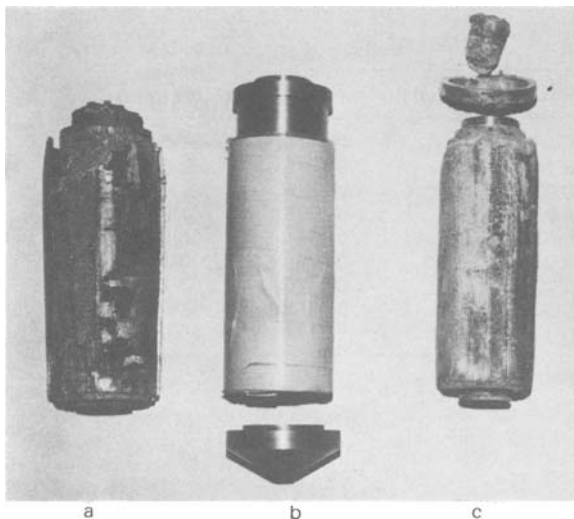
Before and after welding: (a) split due to separation at the base tube, (b) assembly before explosion, (c) successfully welded cylinder.
